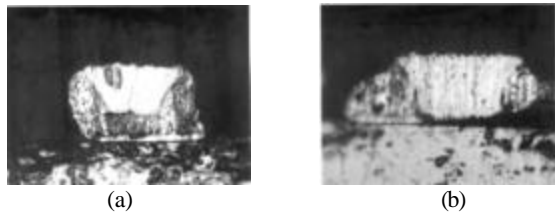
Bump cross-sections of units assembled on non-solder mask defined substrate with (a) Underfill B and (b) Underfill A.
